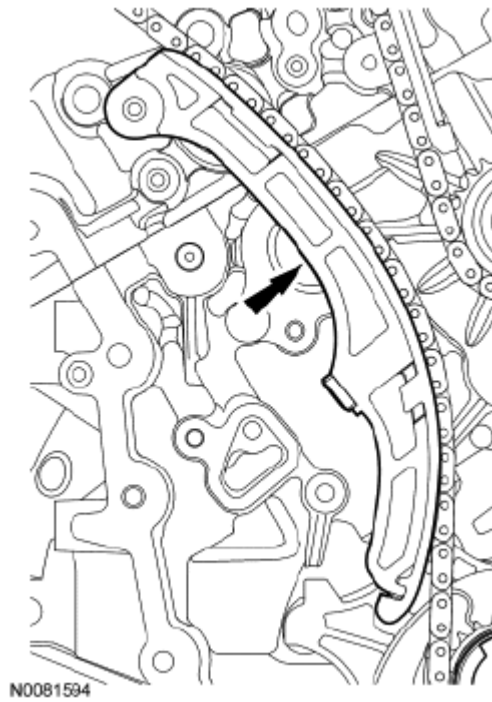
Locating Primary Timing Chain Tensioner Arm
